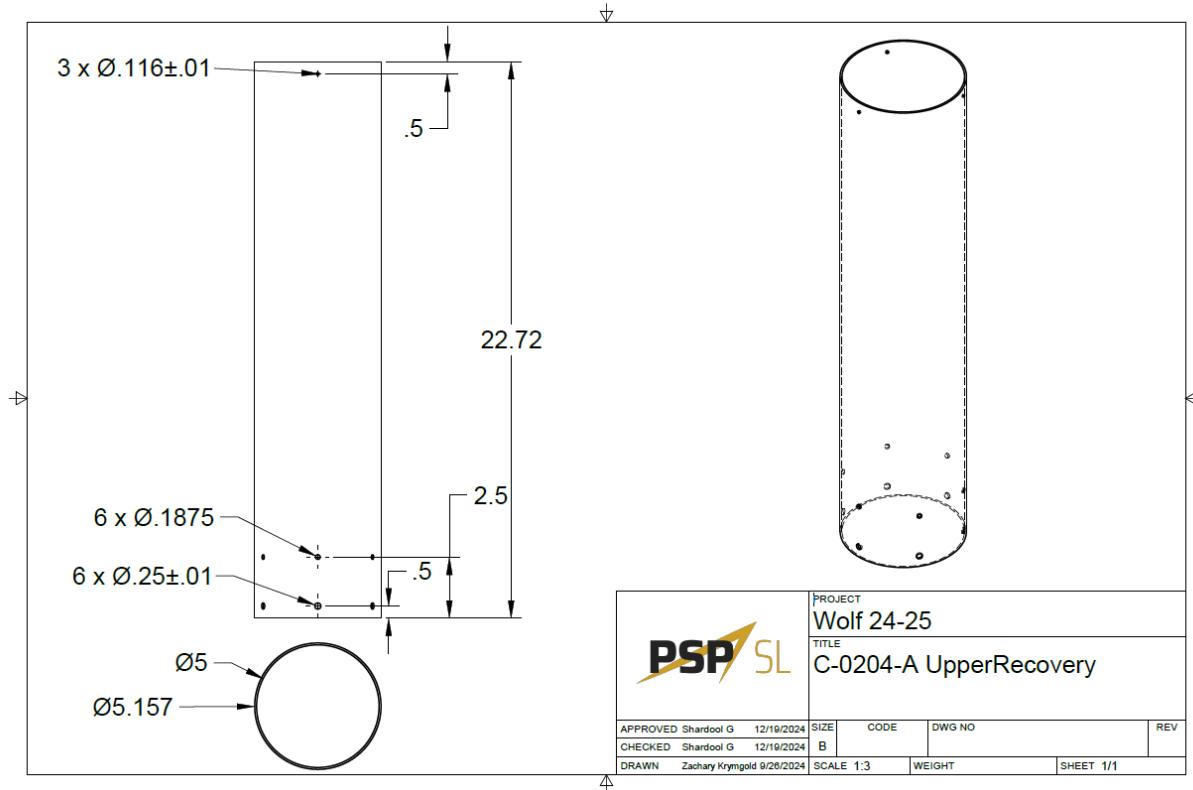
Upper Recovery Airframe Technical Drawing
